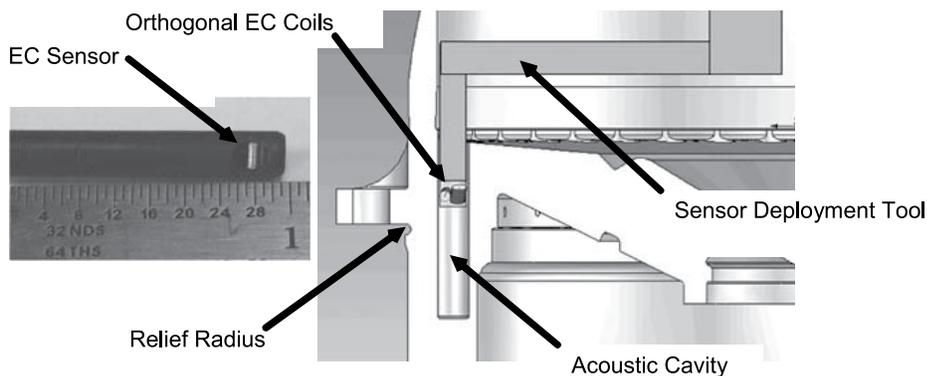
Photograph of prototype eddy current sensor and schematic diagram of eddy current thruster inspection tool
